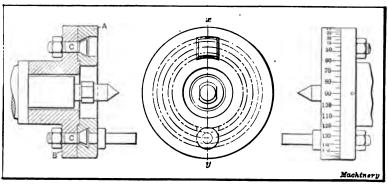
Indexing Faceplate used for Multiple Thread Cutting
